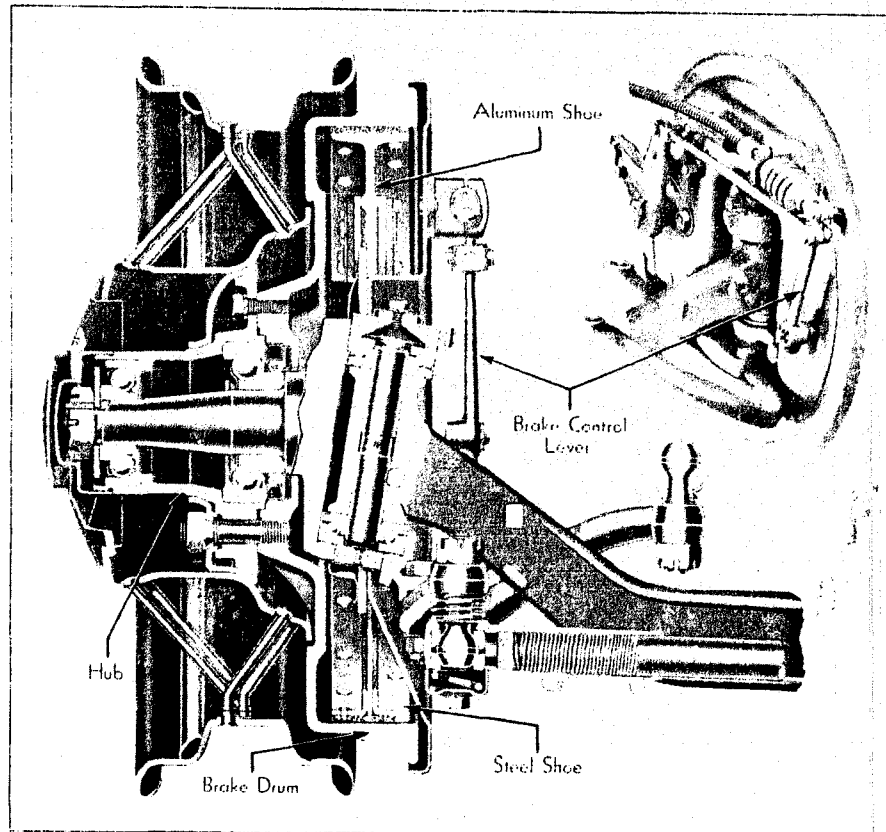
Sectional view of front wheel hub and steering knuckle with details of front brake control
